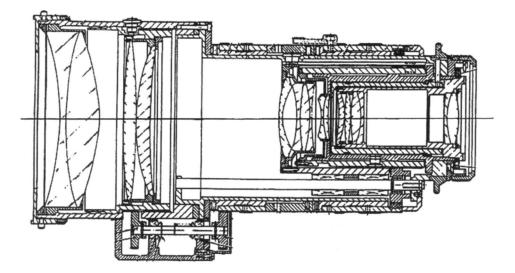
Sectional view of a 25- to 250-mm focal length, f/3.6 photographic zoom lens assembly. (Adapted from Ashton.³⁰)
